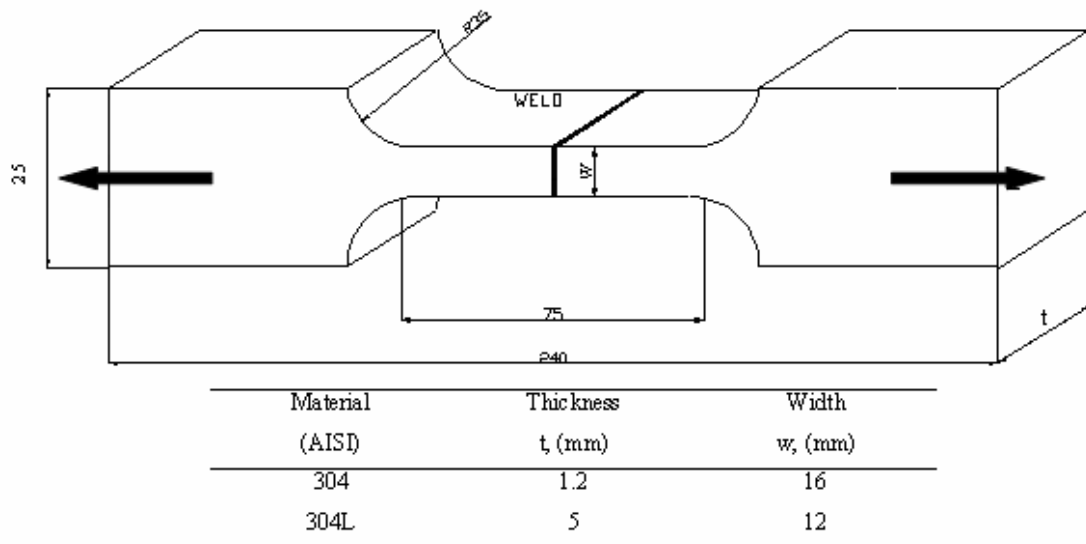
Tensile test loading condition of the welded samples
